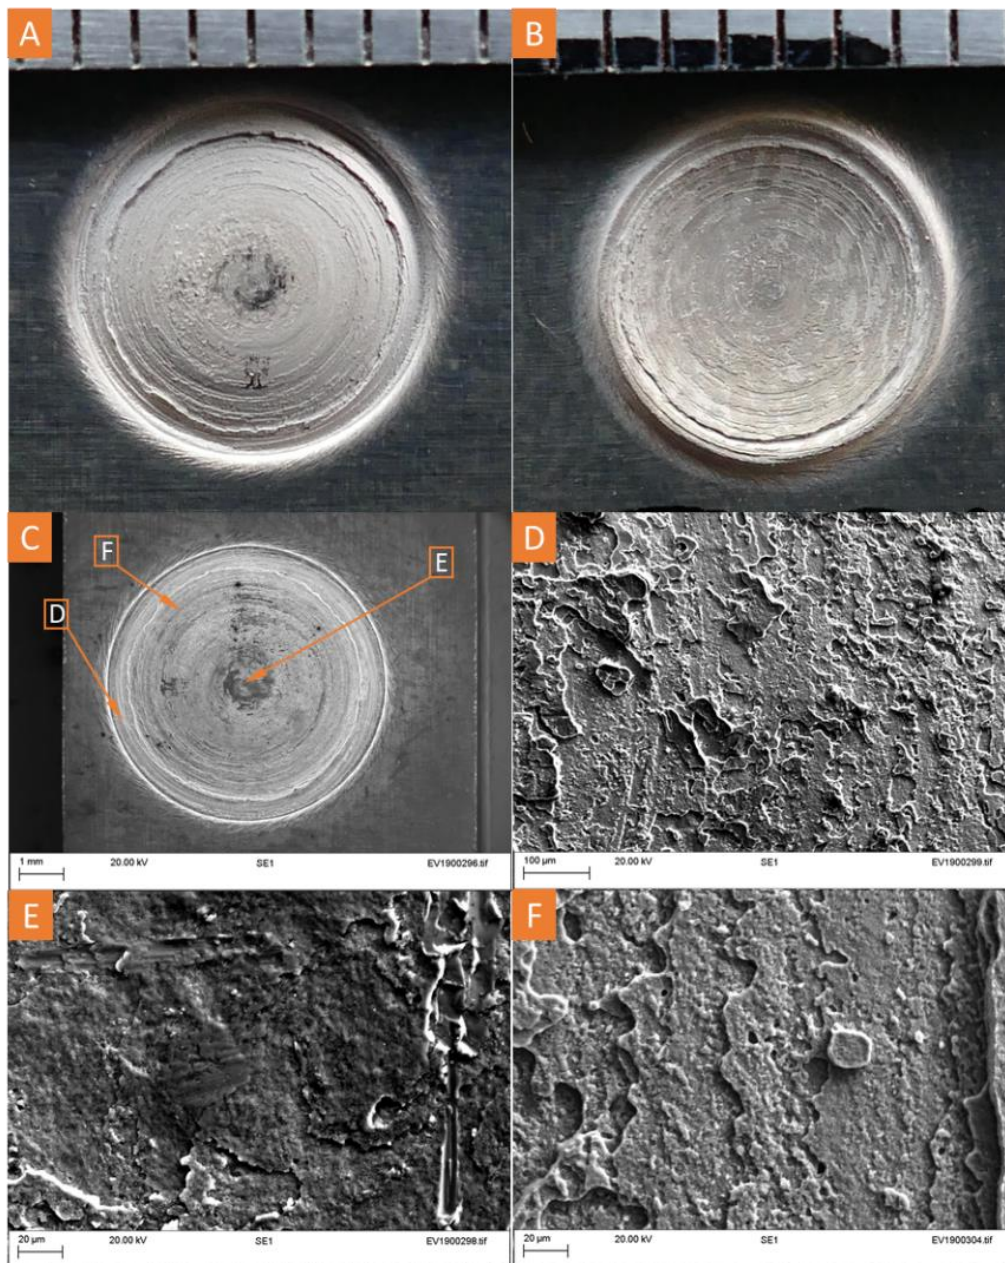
Fracture surfaces of a through interface failure mode of RFSSW AA7075-T6 condition W19 (RS = 1000 rev/min; PD = 2.0 mm):
